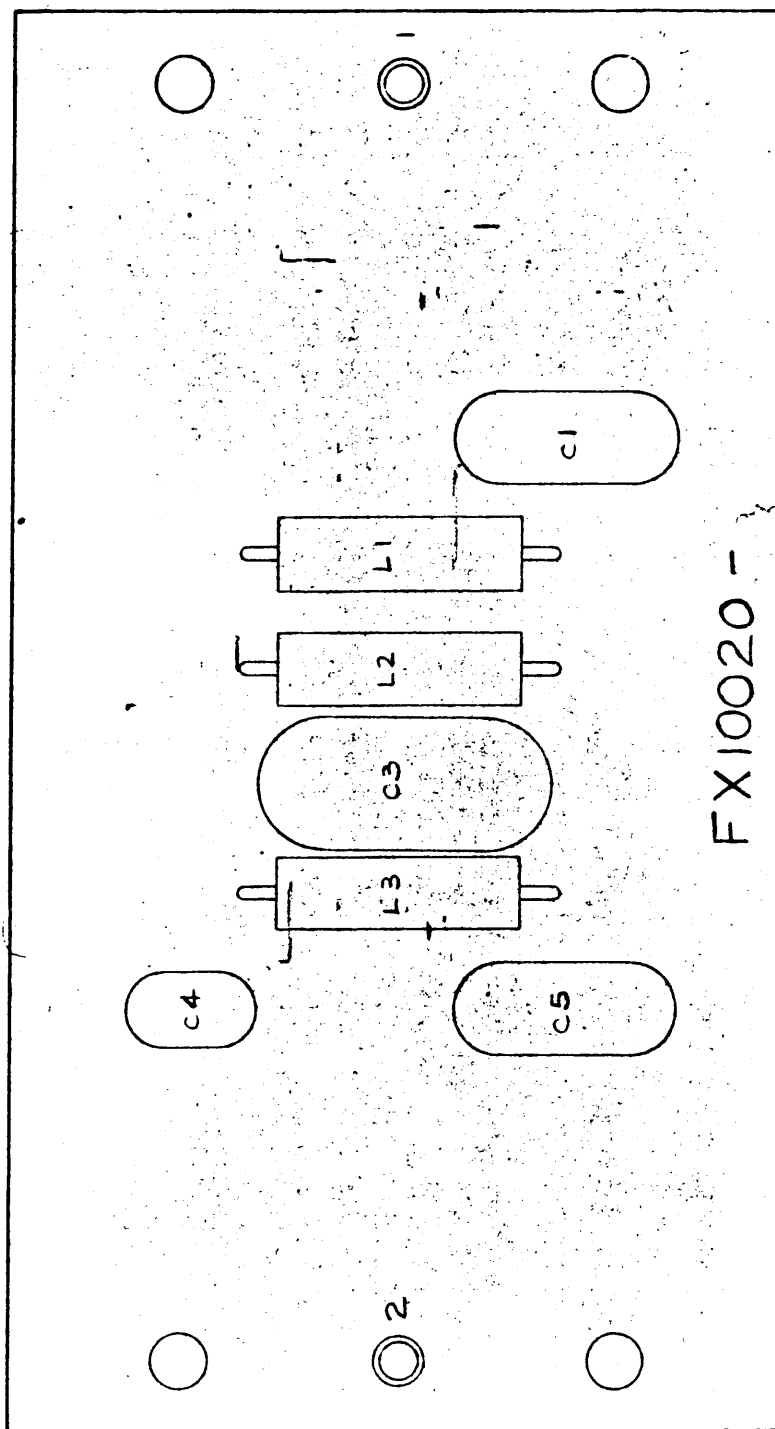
COMPONENT LOCATION, BROADCAST STOPBAND FILTER ASSEMBLY
